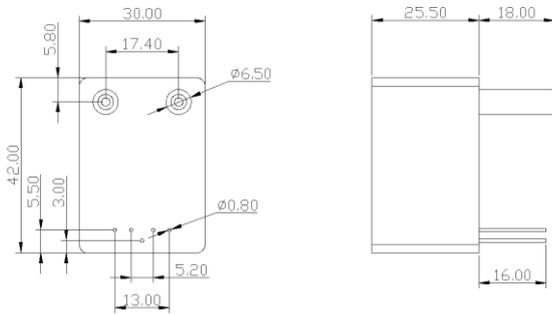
Outline and installation dimensions of MS4 (bottom view and right side view)
